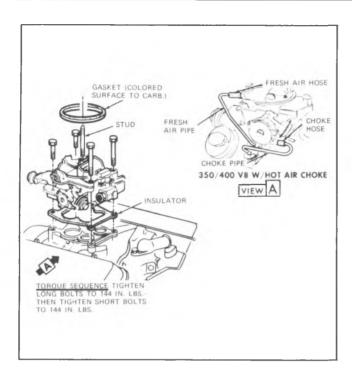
C-56--Carburetor and Choke Pipes-M4MC/ M4ME
